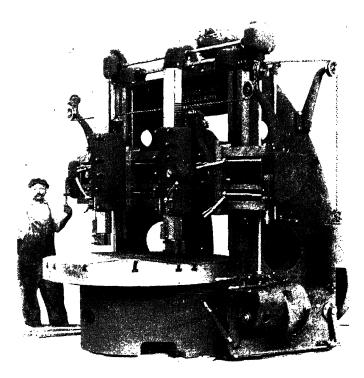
Vertical boring mill. This machine is built also in large sizes, which are used for machining ares having a large radius of curvature. (Niles Bement Pond Co.)
